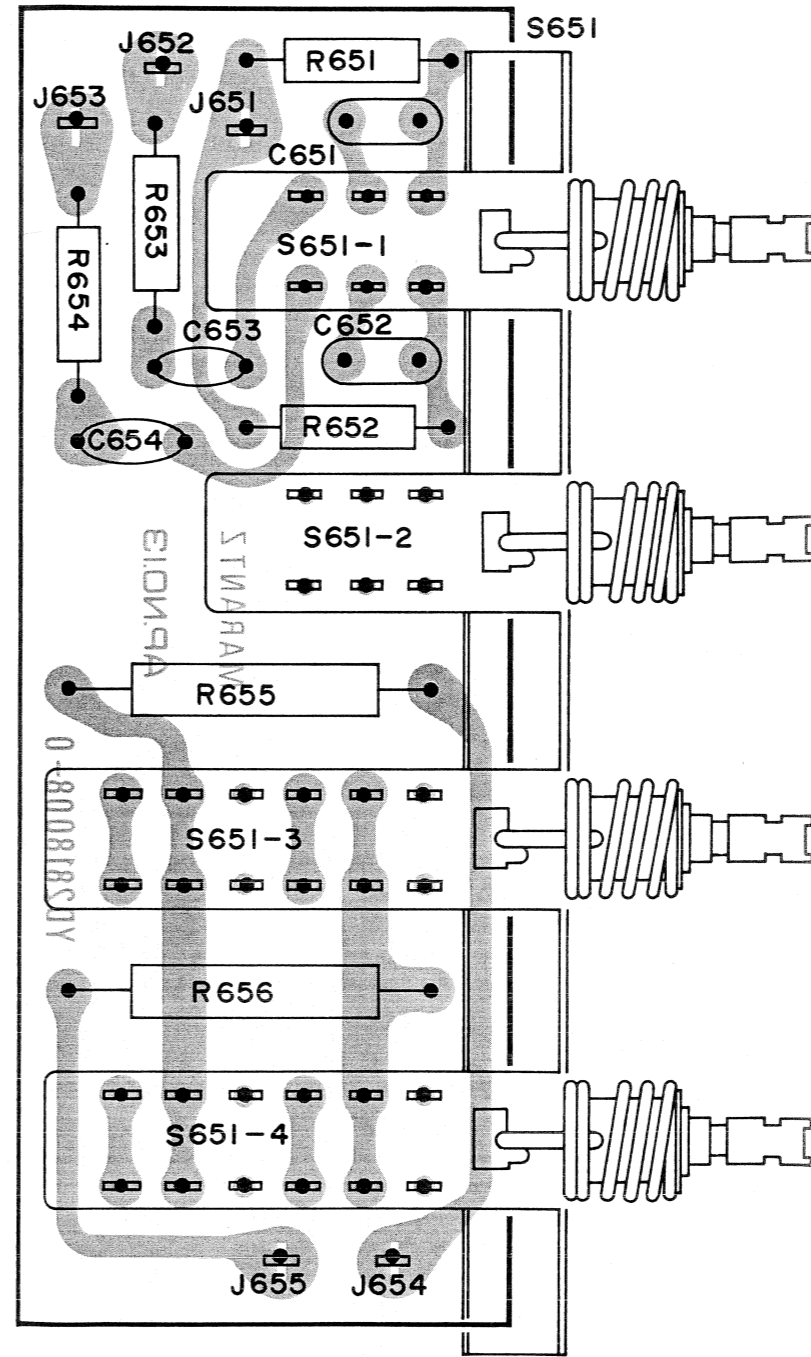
Loudness, Muting and Speakers Switch Assembly P650 Component Locations
